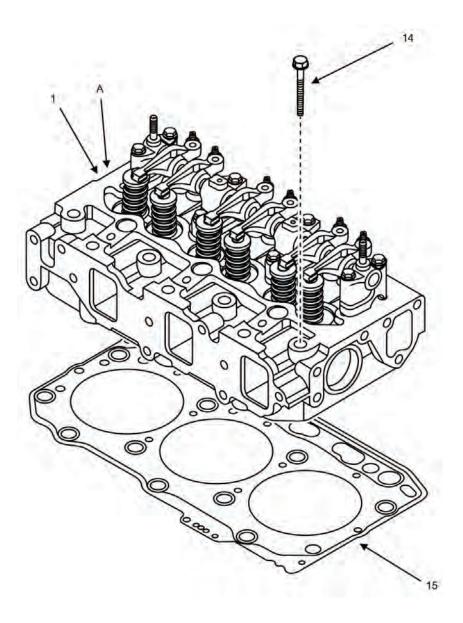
Cylinder Head Assembly (Sheet 1 of 2).
